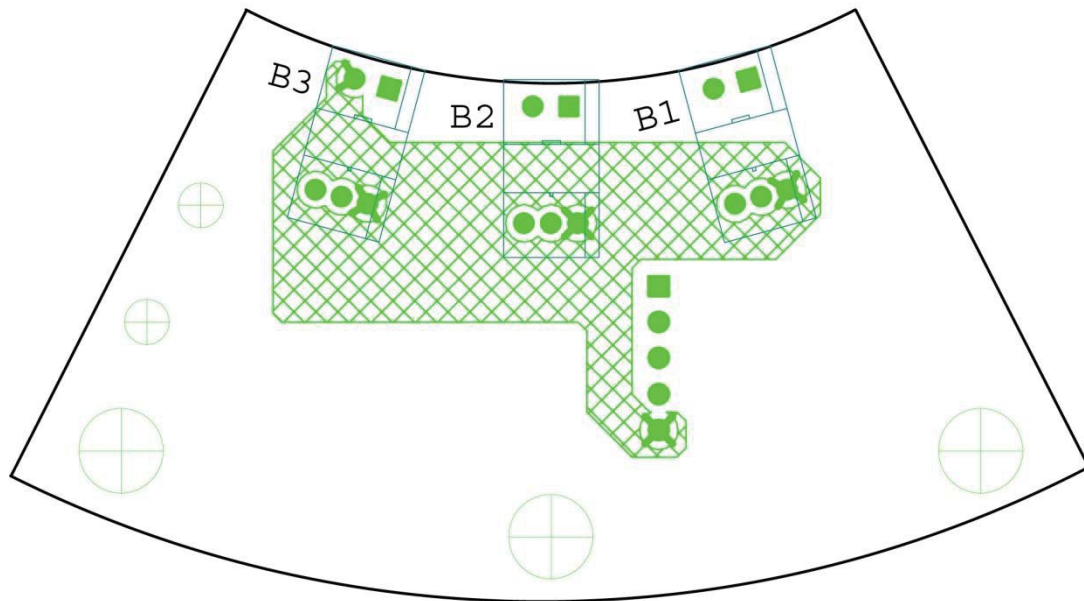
Rotor Position Sensor Circuit Board Bottom Layer
